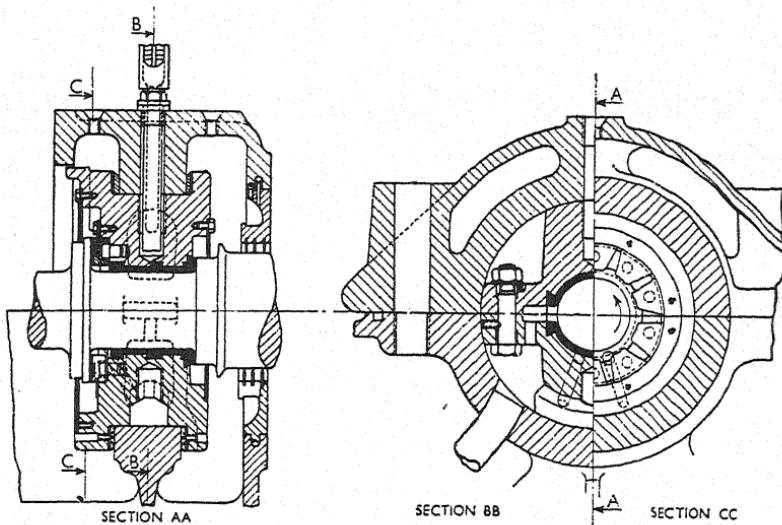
Pad Thrust Bearing for Slight Thrusts and High Shaft Speeds for a Steam Turbine (Allgemeine Elektricitäts Gesellschaft)
